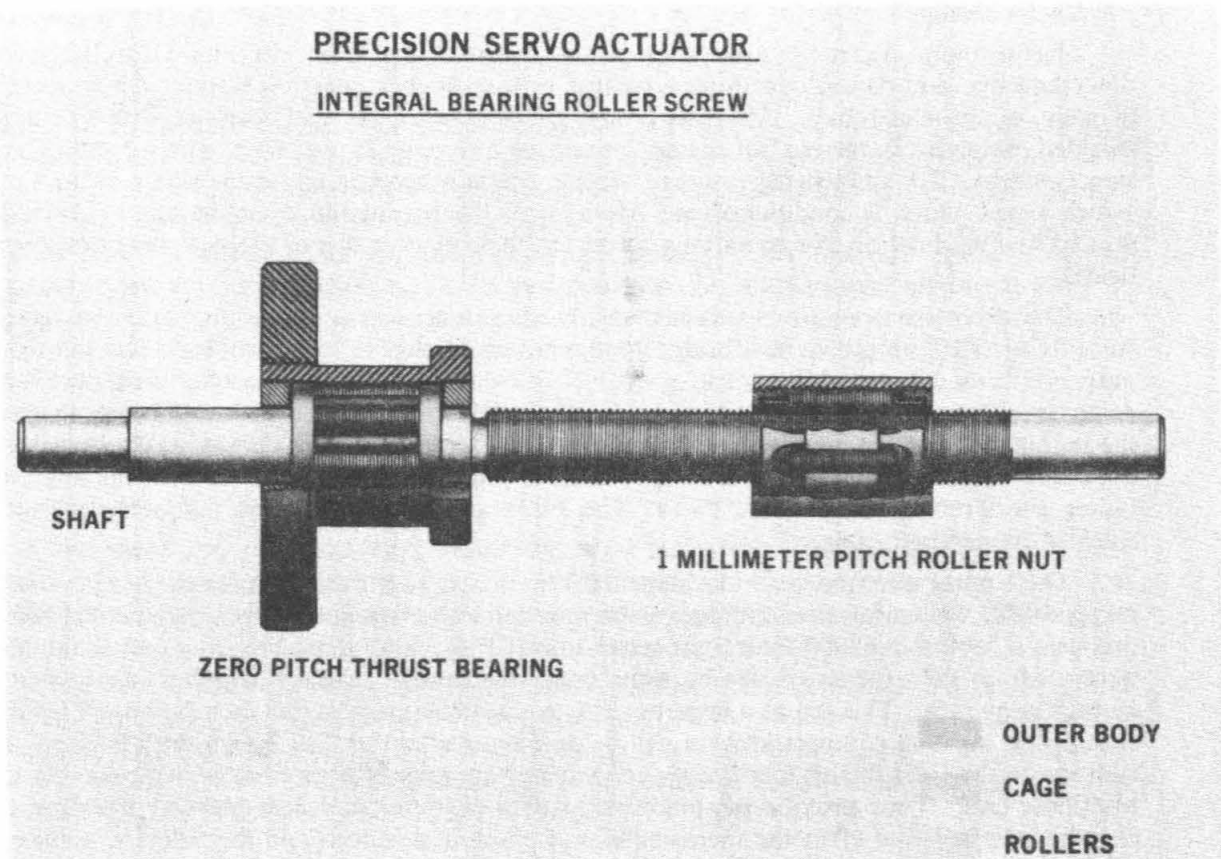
Section drawing of the integral bearing roller screw shaft with a roller thrust bearing to the left and the 1mm pitch roller bearing on the right that drives the pusher shaft attached to the whiffletree.
